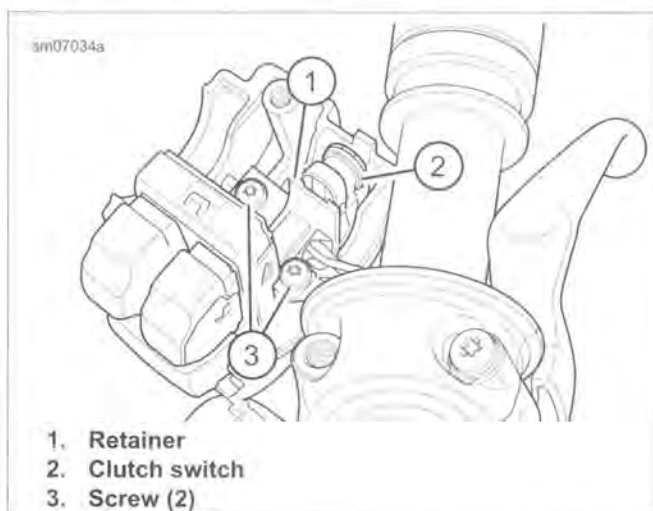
Left Handlebar Control Module and Clutch Switch Retainer
